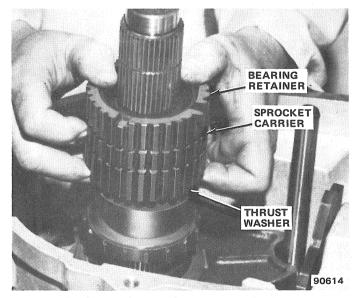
D-19 Sprocket Carrier, Bearing Retainers, Thrust Washer and Needle Bearing Removal
